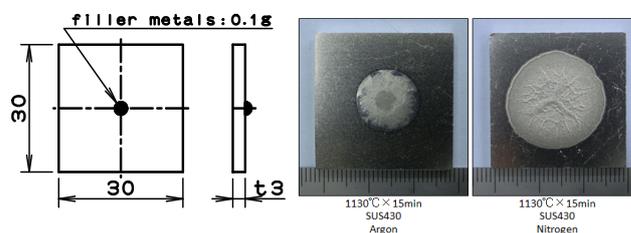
Wetting (Spreading) test piece and these specimen dimensions. Filler metal (paste state): 0.1 grams.
